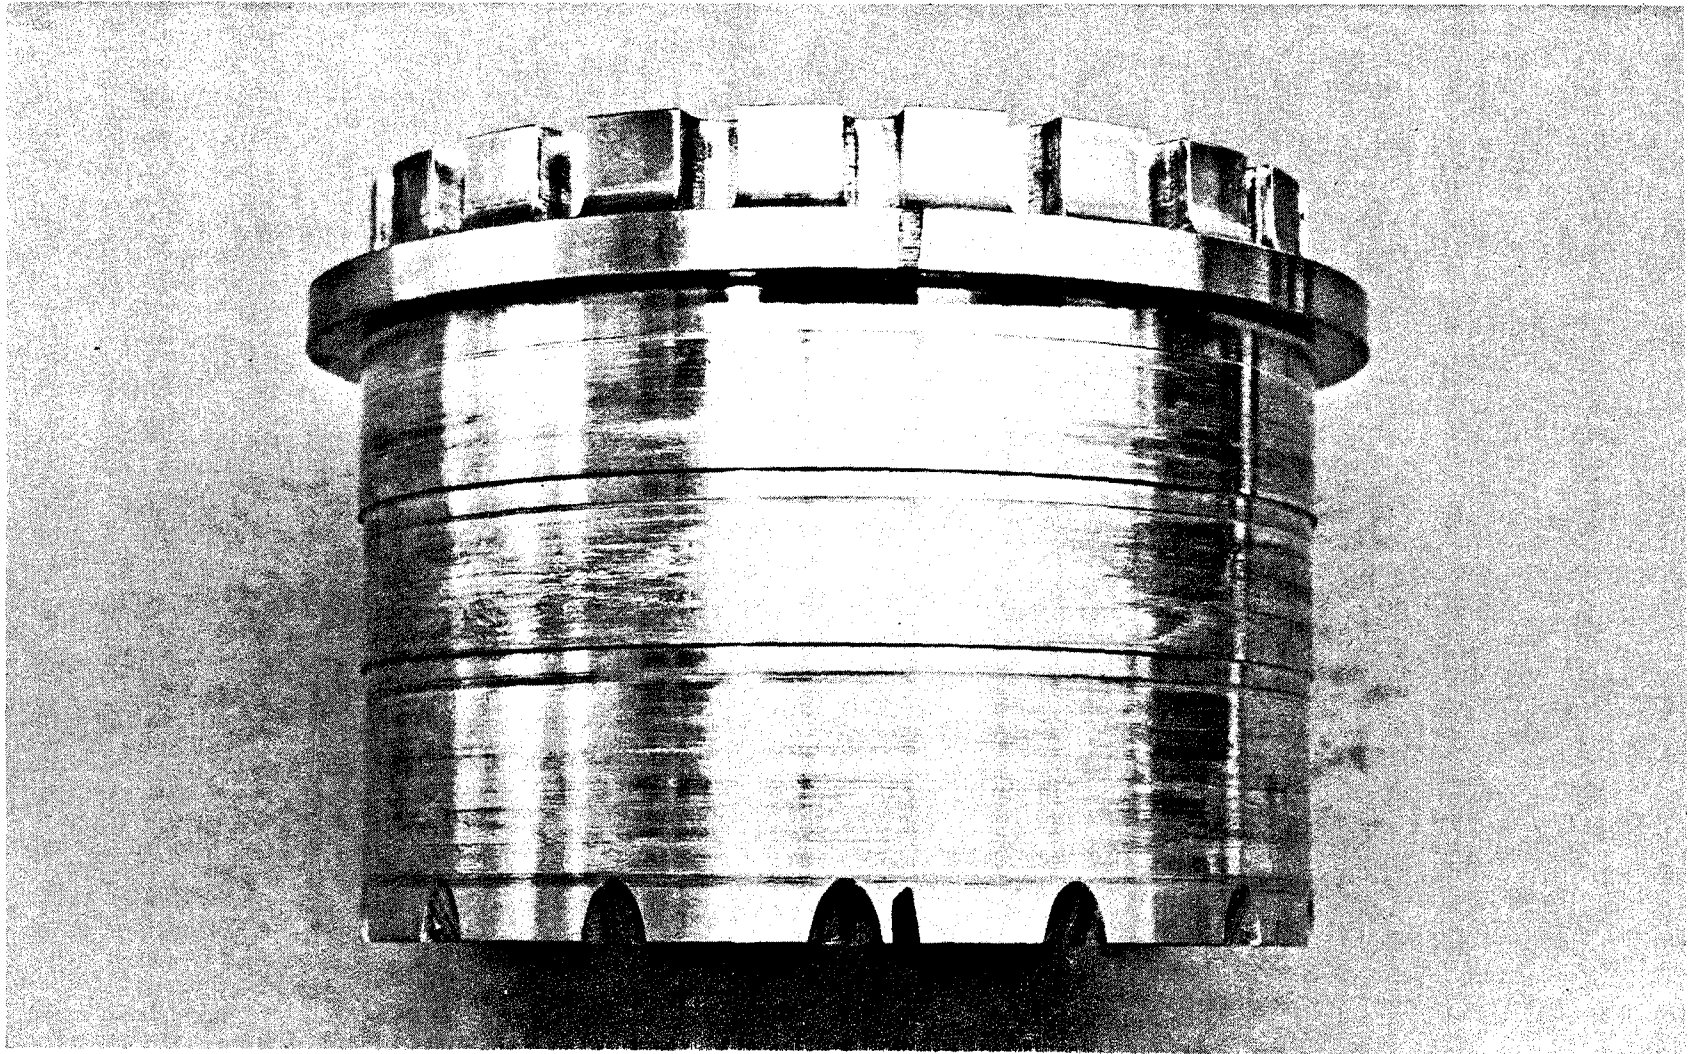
SPACE SHUTTLE MAIN ENGINE (SSME) HIGH PRESSURE FUEL TURBOPUMP (HPFTP) 0110R1 RUBBED IMPELLER INTERSTAGE SEAL ROTOR
